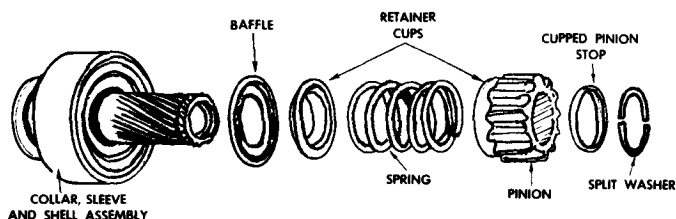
Disassembled view of late type heavy duty sprag clutch drive assembly.
